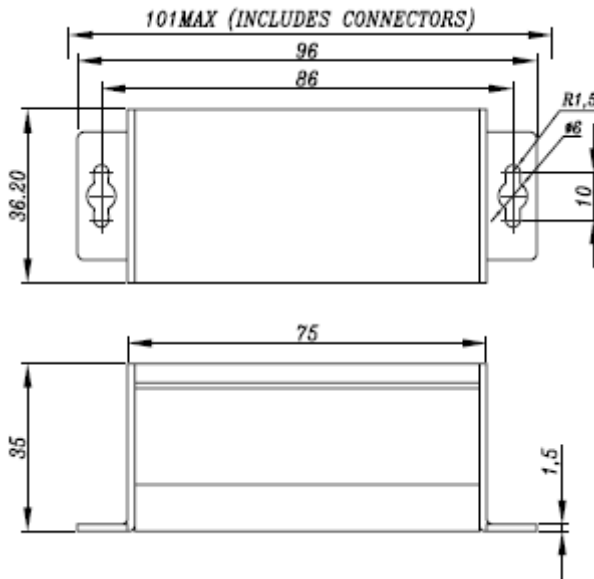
Dimensional drawings of Micro unit (mm)
